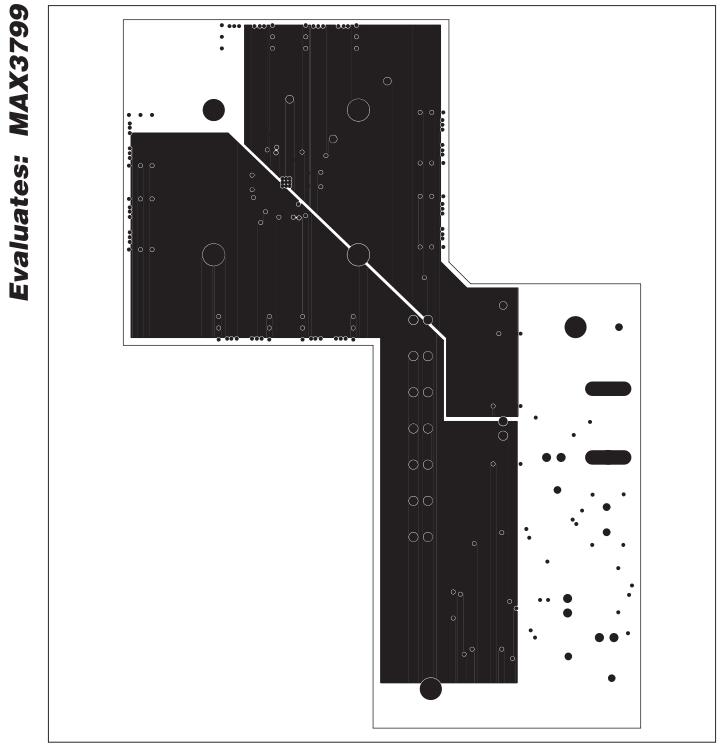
MAX3799 EV Kit PCB Layout—Power Plane
